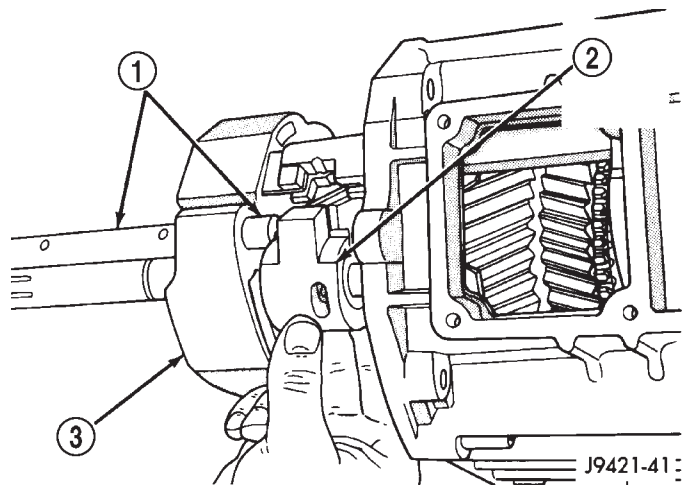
SHIFT SHAFT LEVER AND BUSHING
